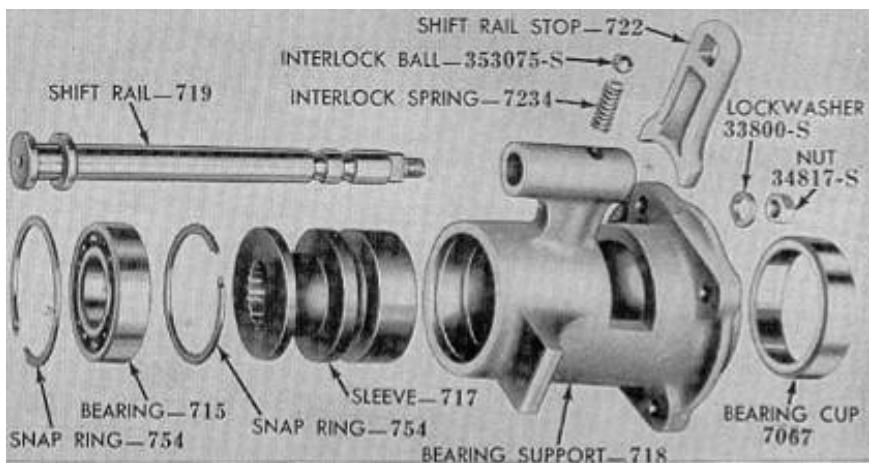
Power take-off shifter assembly which is mounted on rear wall of transmission housing. Models 2N-8N-9N. Refer also to Fig. F057.
